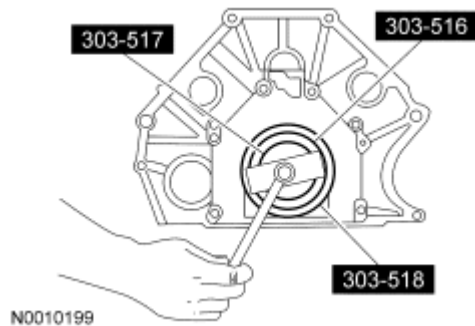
Installing Crankshaft Rear Oil Slinger Using Special Tools
